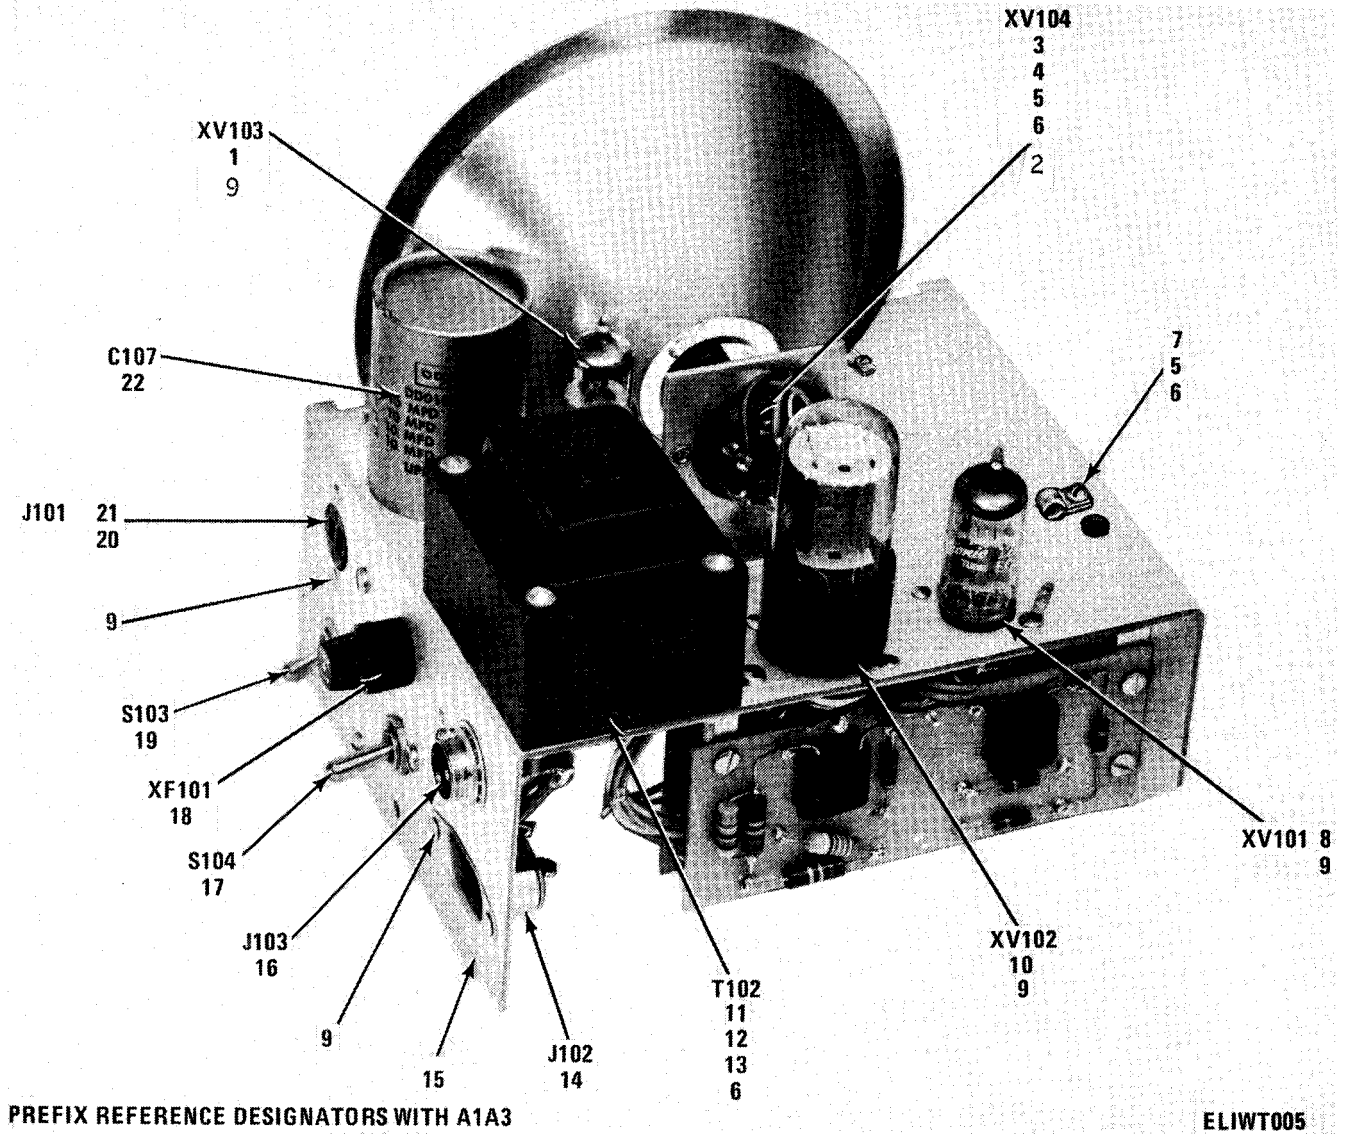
① . Chassis assembly (Sheet 1 of 2)
